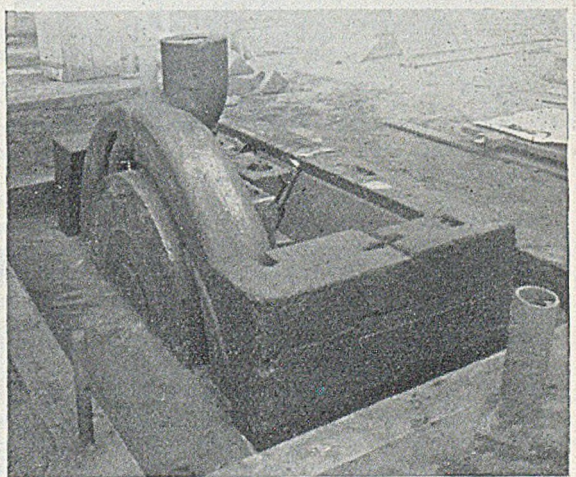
Trunk Core assembled in the Exhaust-casing Mould.
